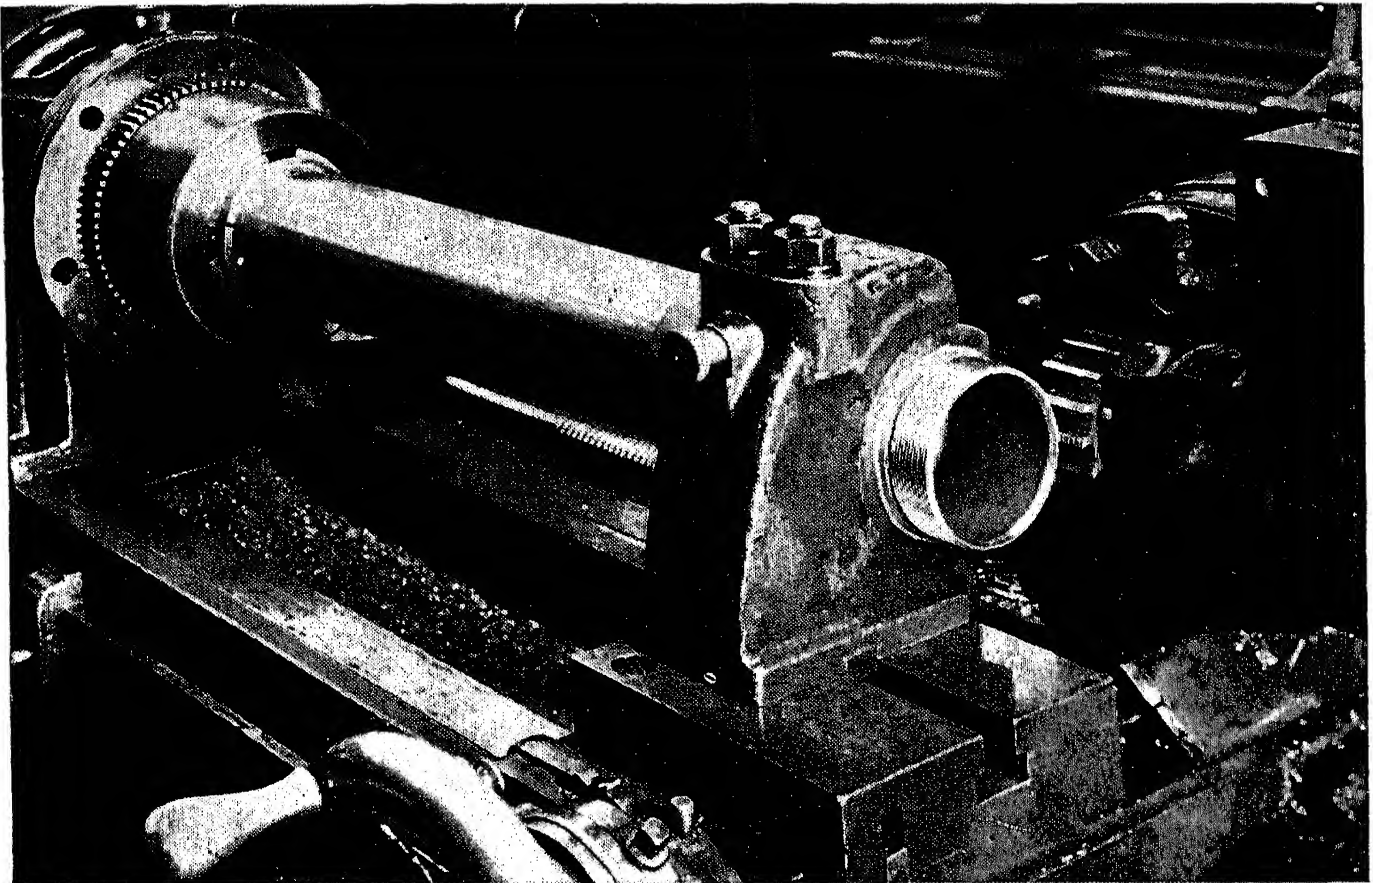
A view of an external thread milled with a multiple thread form cutter on a thread miller. (Pratt and Whitney Photo from Pratt and Whitney Division, Niles-Bement-Pond Co., W. Hartford, Conn.)
